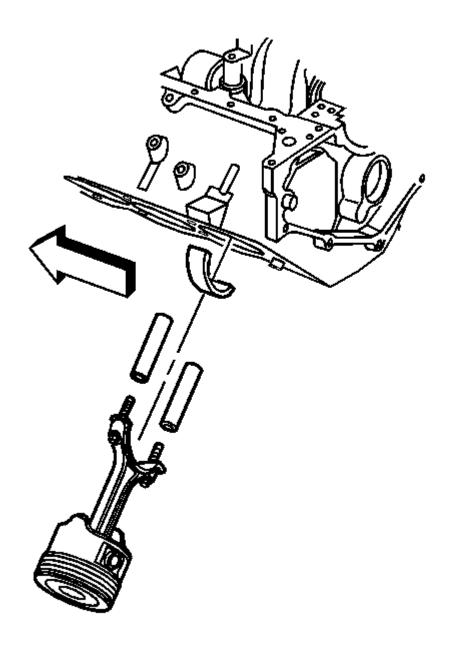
Installing Rubber Fuel Line Onto Connecting Rod Bolts Courtesy of GENERAL MOTORS CORP.
